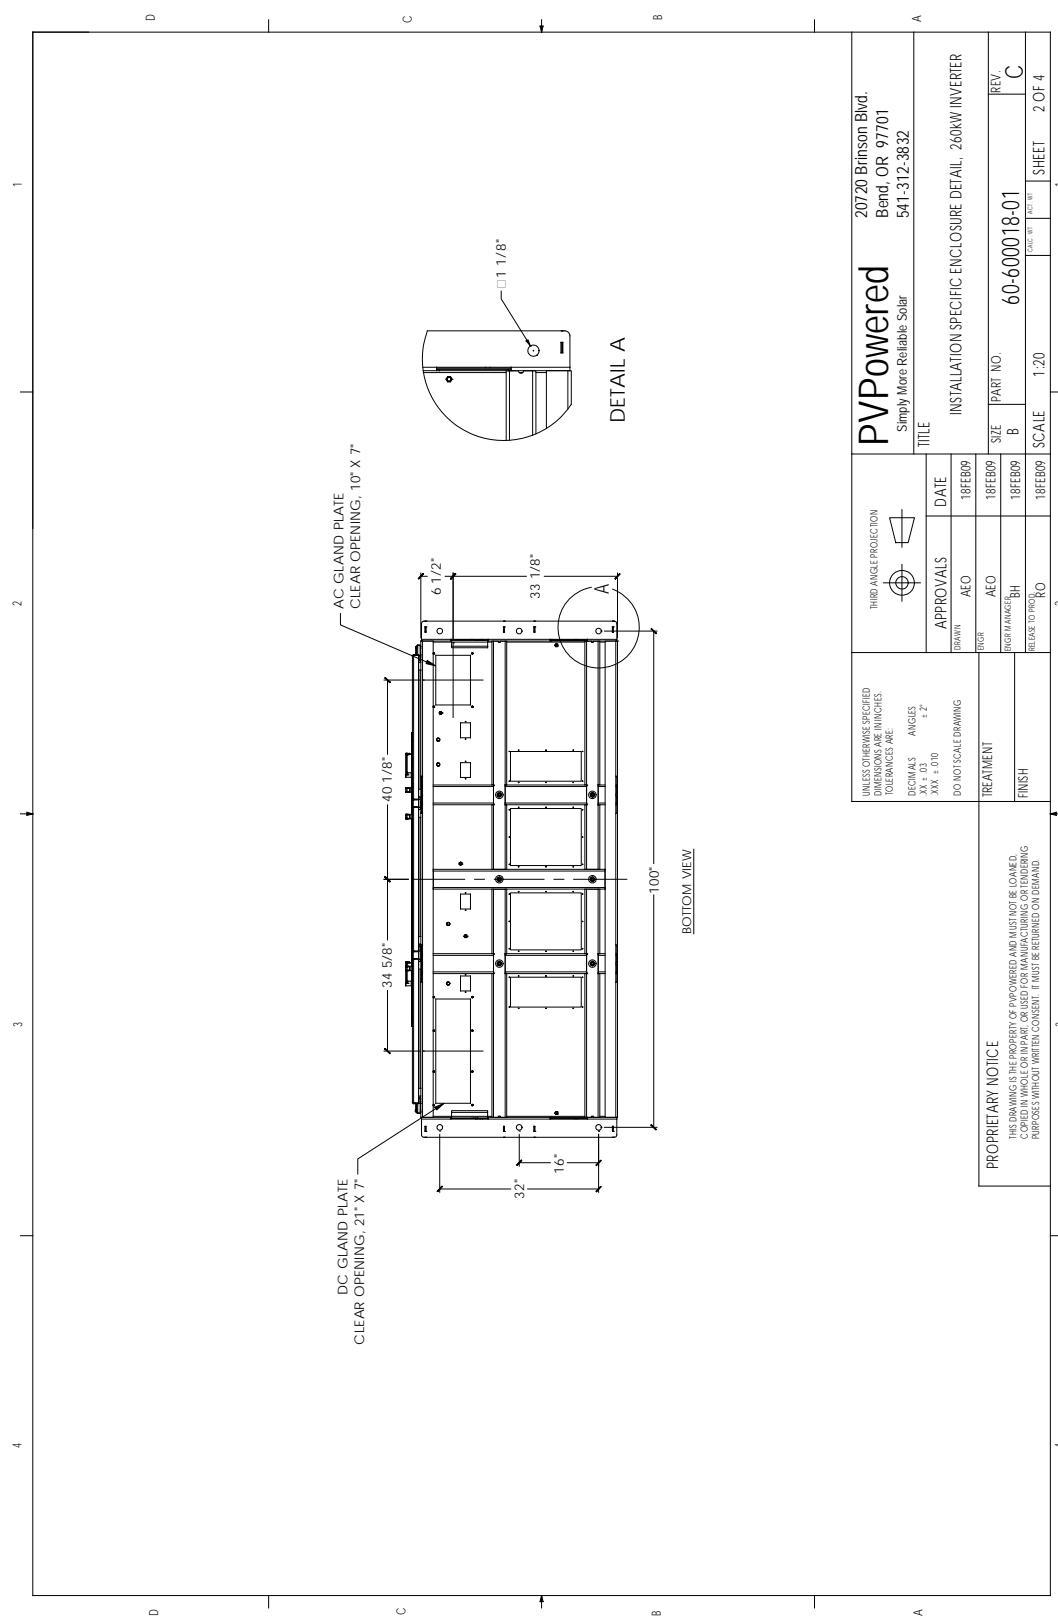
PVP250kW/PVP260kW Mechanical Drawing - View 2
